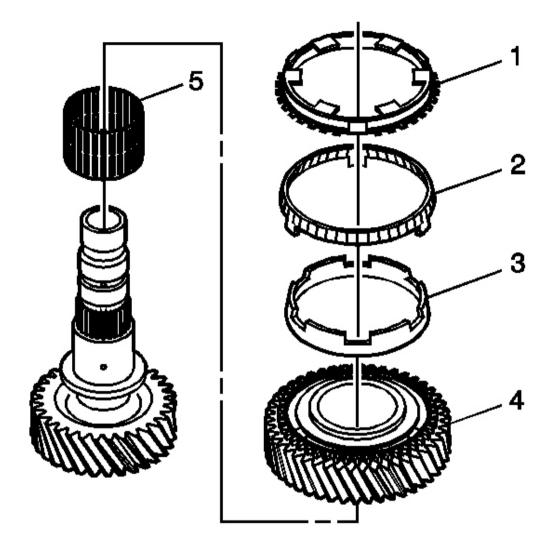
Exploded View Of 2nd Gear Assembly Courtesy of GENERAL MOTORS CORP.
